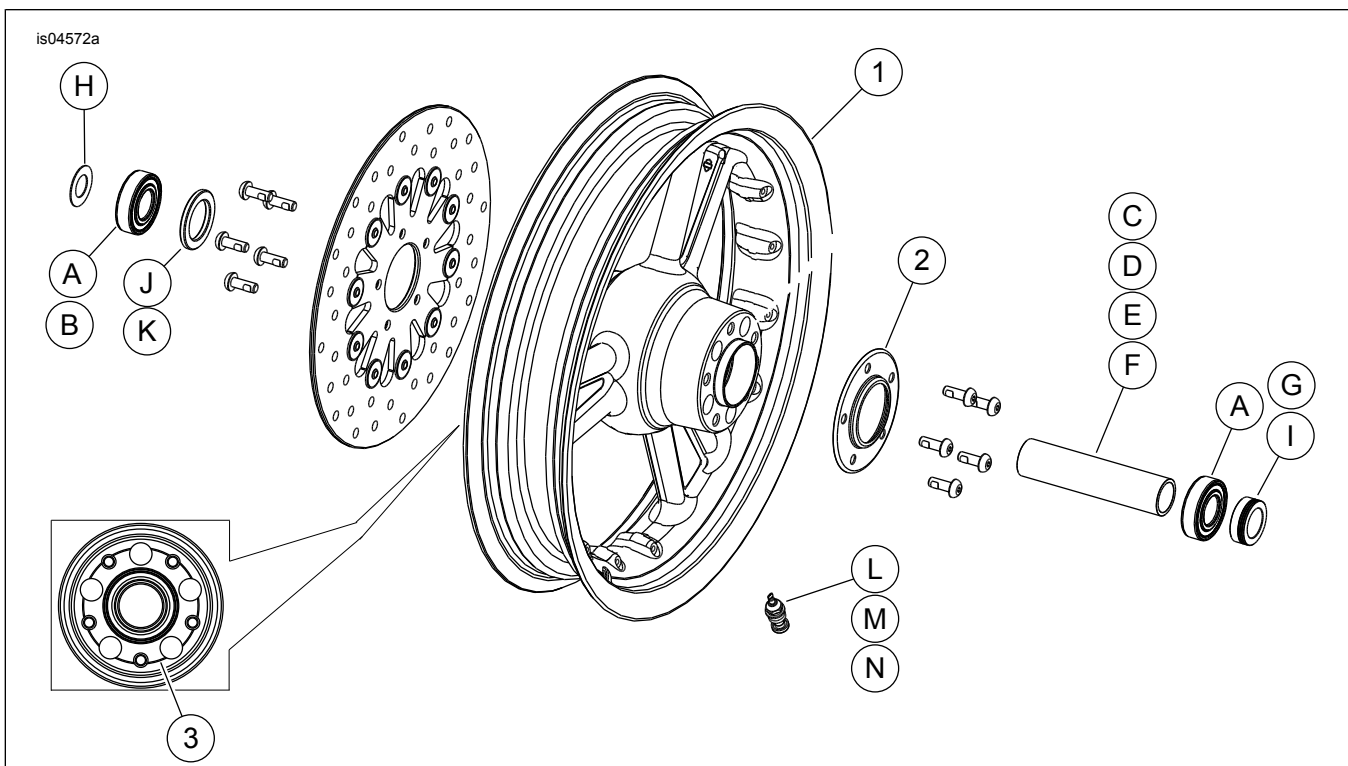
Service Parts: Front Detonator Wheels (16-inch wheel shown)
